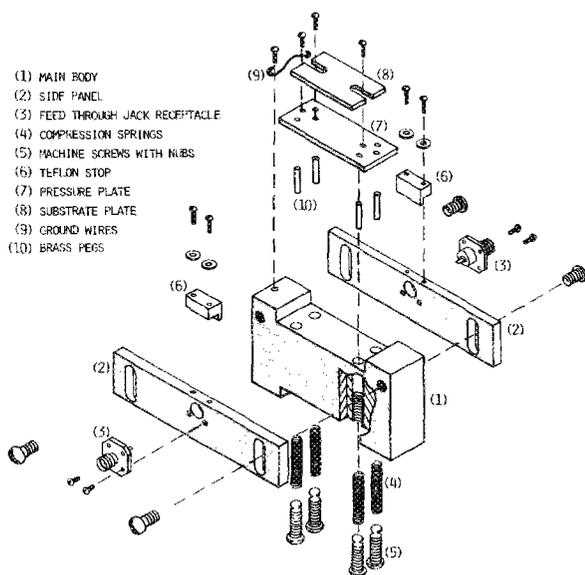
Exploded view of the spring-loaded microwave test fixture.
